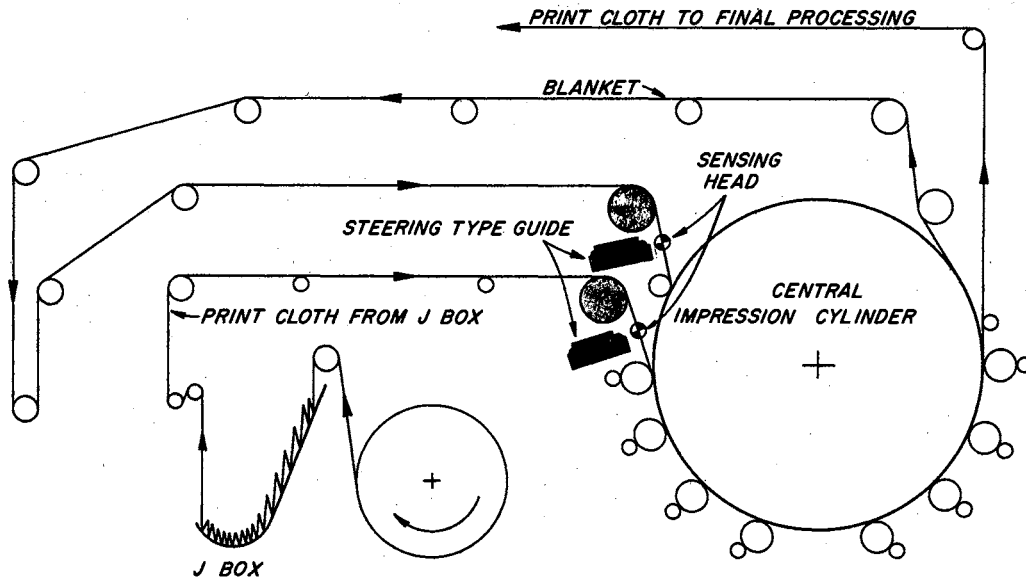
Cloth Printing Machine With Automatic Web Guides for Blanket and Cloth
